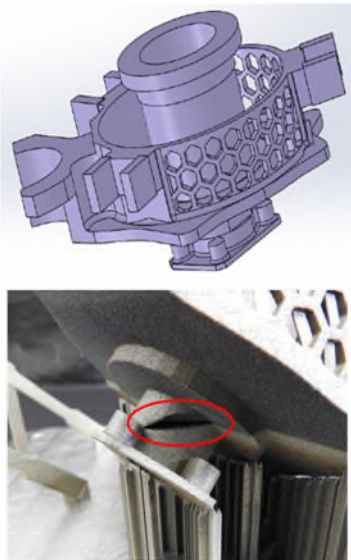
Top panel: CAD model of an aerospace part produced via LPBF; bottom panel: example of local defect in the as-built part
